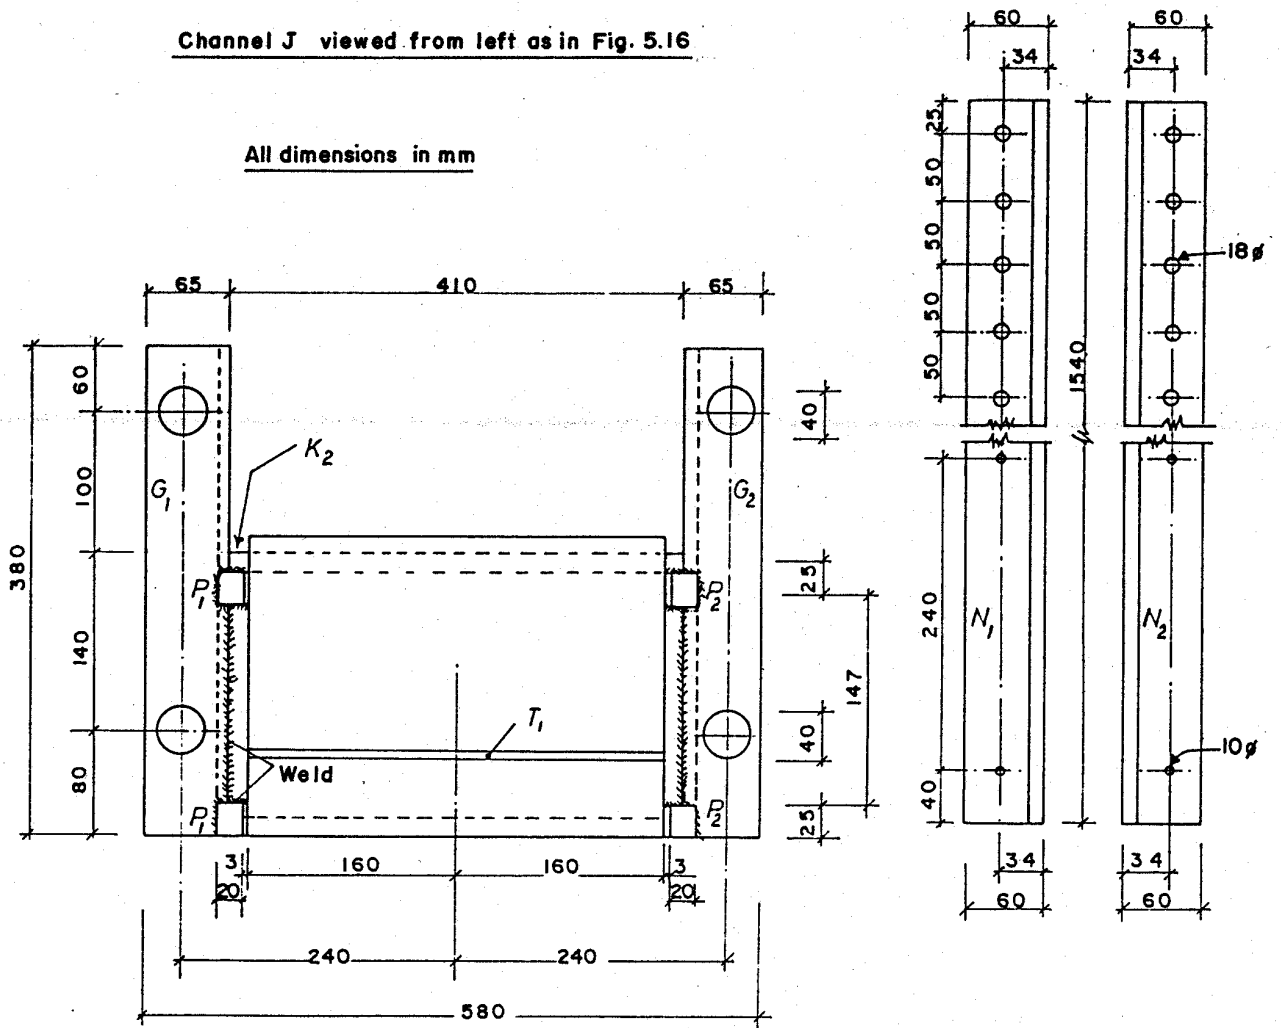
Layout of the hooks P, details of the clamping pieces L and angles N
